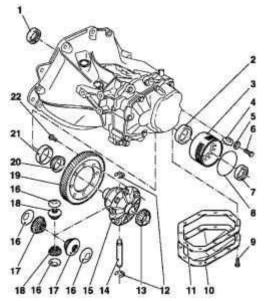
Differential gearbox F13: 1 - O-ring shaft wheel, 2 - outer ring taper roller bearings, 3 - cage, 4 - tongue blocking, 5 - spring washer, 6 - bolt; 7 - O-ring shaft wheel, 8 - O-ring; 9 - bolt, 10 - cap differential, 11 - Gasket 12 - retaining rings; 13 - inner ring of the taper roller bearing, 14 - axle differential mechanism; 15 - housing differential, 16 - annular friction pads; 17 - bevel gears shaft wheels, 18 - differential bevel gears, 19 - toothing; 20 - the inner ring of taper roller bearing, 21 - outer ring taper roller bearing, 22 - Bolt
